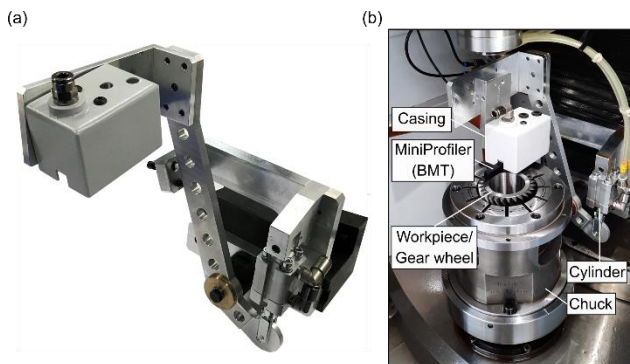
(a) Mechanical adapter for the MiniProfiler, (b) Assembled and integrated adapter
